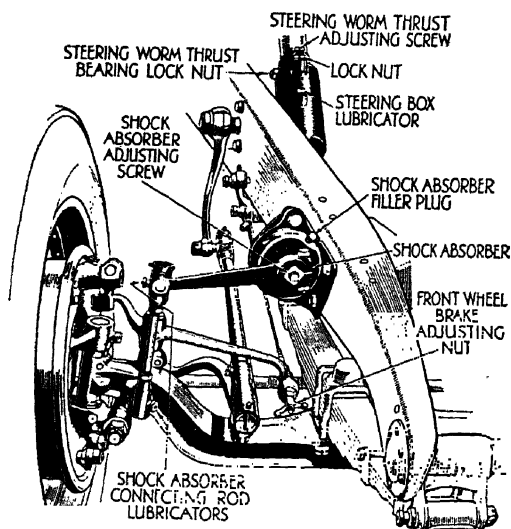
Typical Front Axle, showing Steering Mechanism and Hydraulic Shock Absorber.
